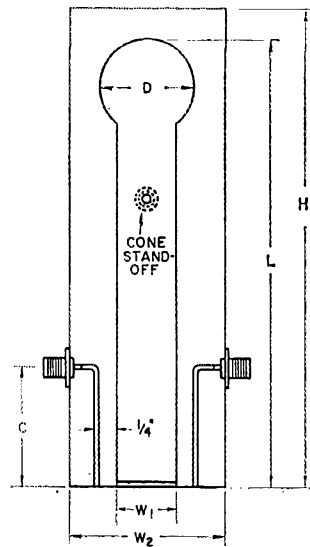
Dimension drawing of filters for 144, 220 and 432 Mc. The disk that comprises the fixed plate of the capacitor may be cut from the same piece as the inner conductor, or made separately and bolted or soldered on. A standard chassis of the nearest available size may be used for the outer conductor of the line, provided that the inner is approximately as shown below. Coupling loops may be terminated with soldering lugs in aluminum models. Inner conductor located at the middle of the outer, in both dimensions, is supported on a ceramic cone insulator.
